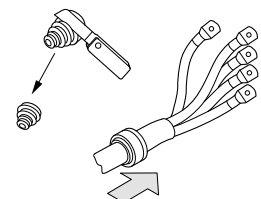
Cut the cable grommets to size according to the cable cross section and feed the cable through
